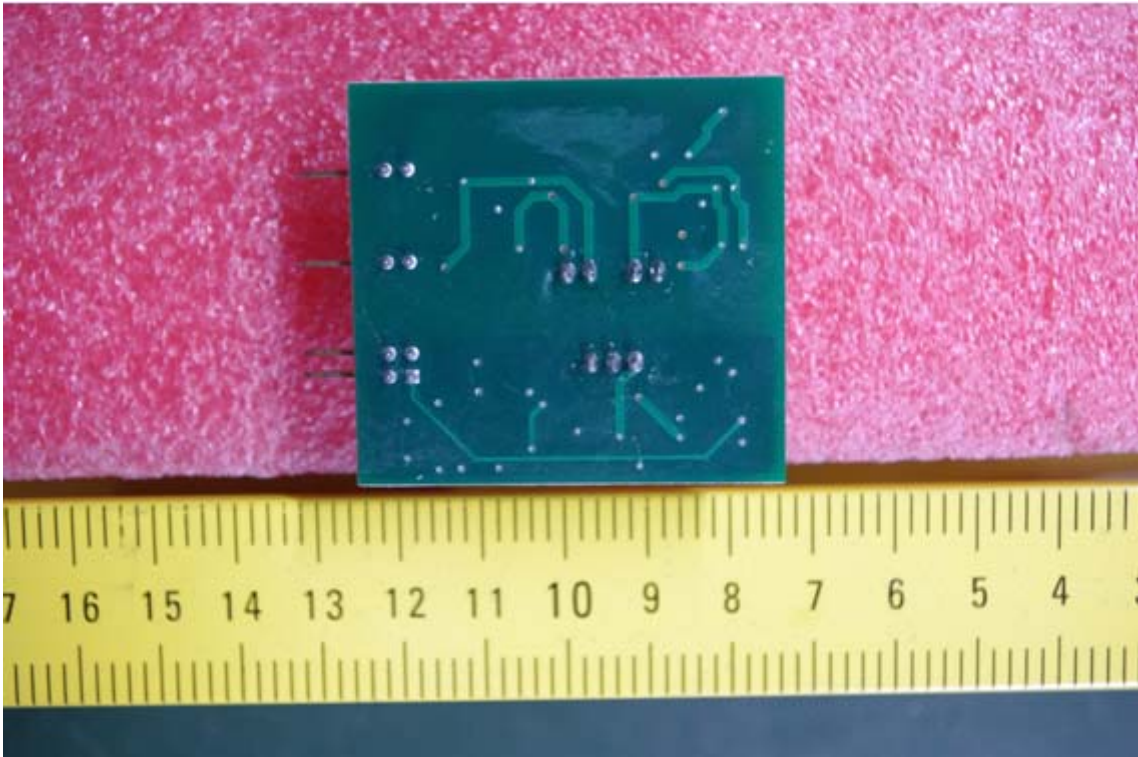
Board SNT_PCB_3320_ZQ, traces side view
